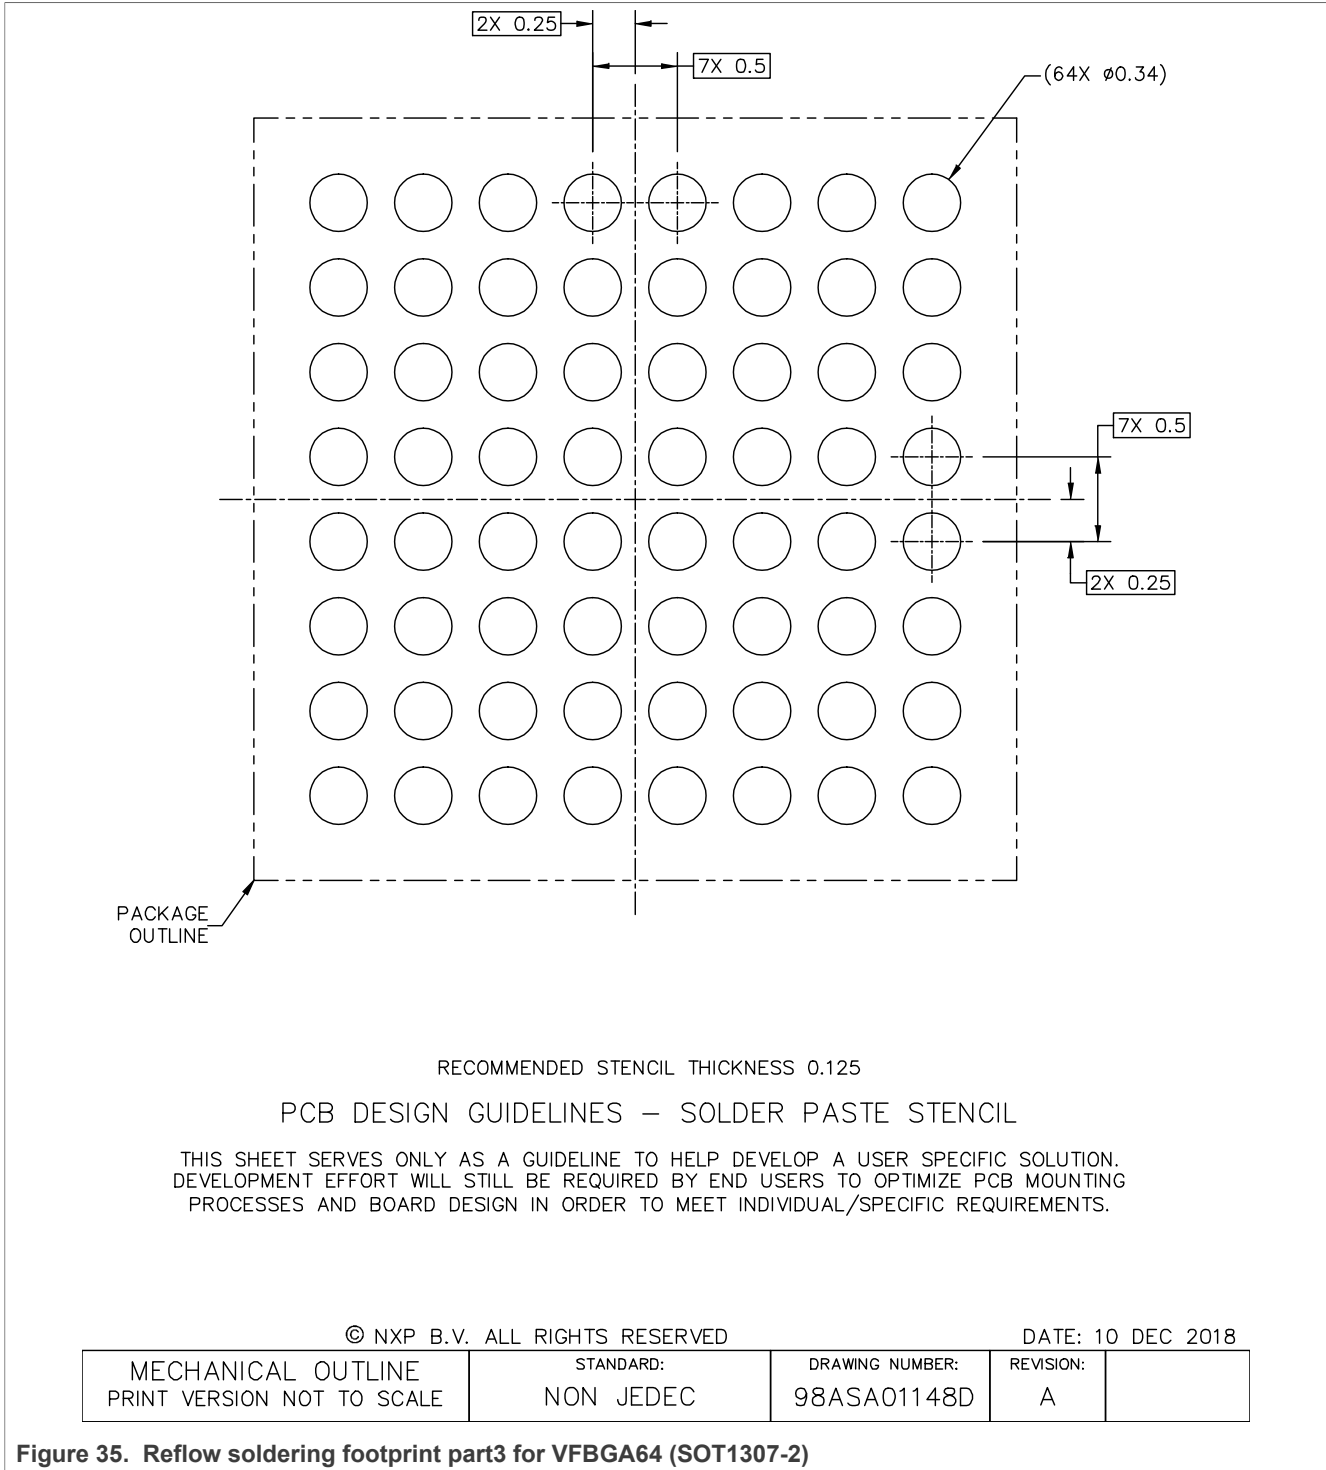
Reflow soldering footprint part3 for VFBGA64 (SOT1307-2)
